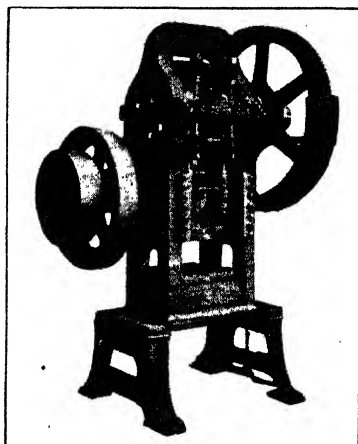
A cam drawing press of the type employing two-way cams to actuate the outer slide.
